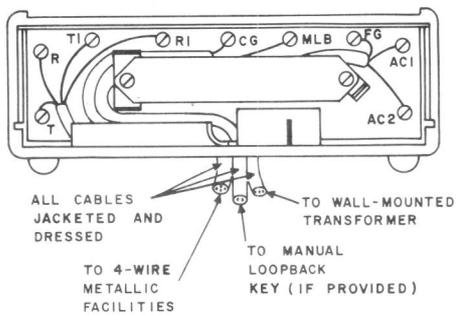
44A1 Data Mounting Showing Dress of Cable Connections
